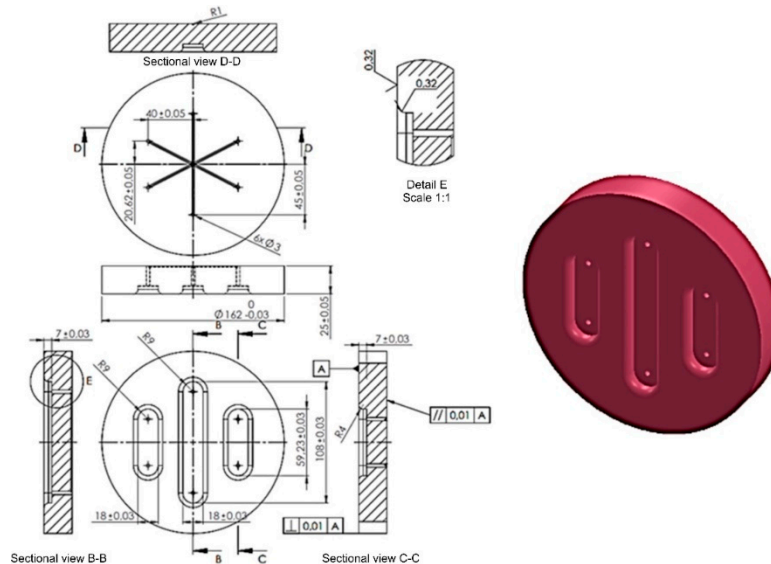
Shape and dimensions of the die used to form Inconel 625 sheet metals.
